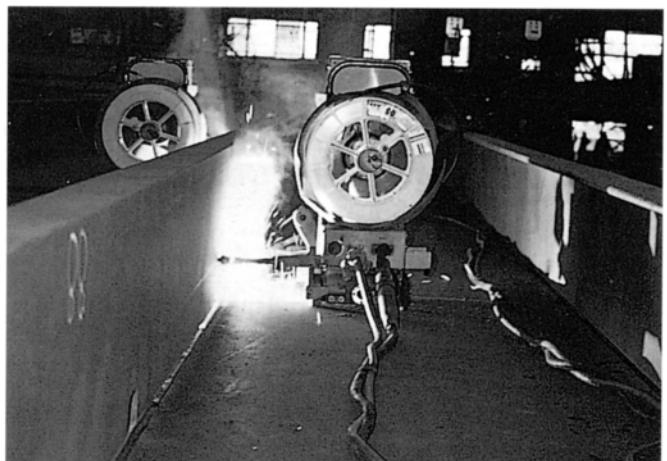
Fillet welding of longitudinal components by using a portable fillet welding carriage and MX-200 in shipbuilding (By courtesy of Tsuneishi Shipyard, Japan)
